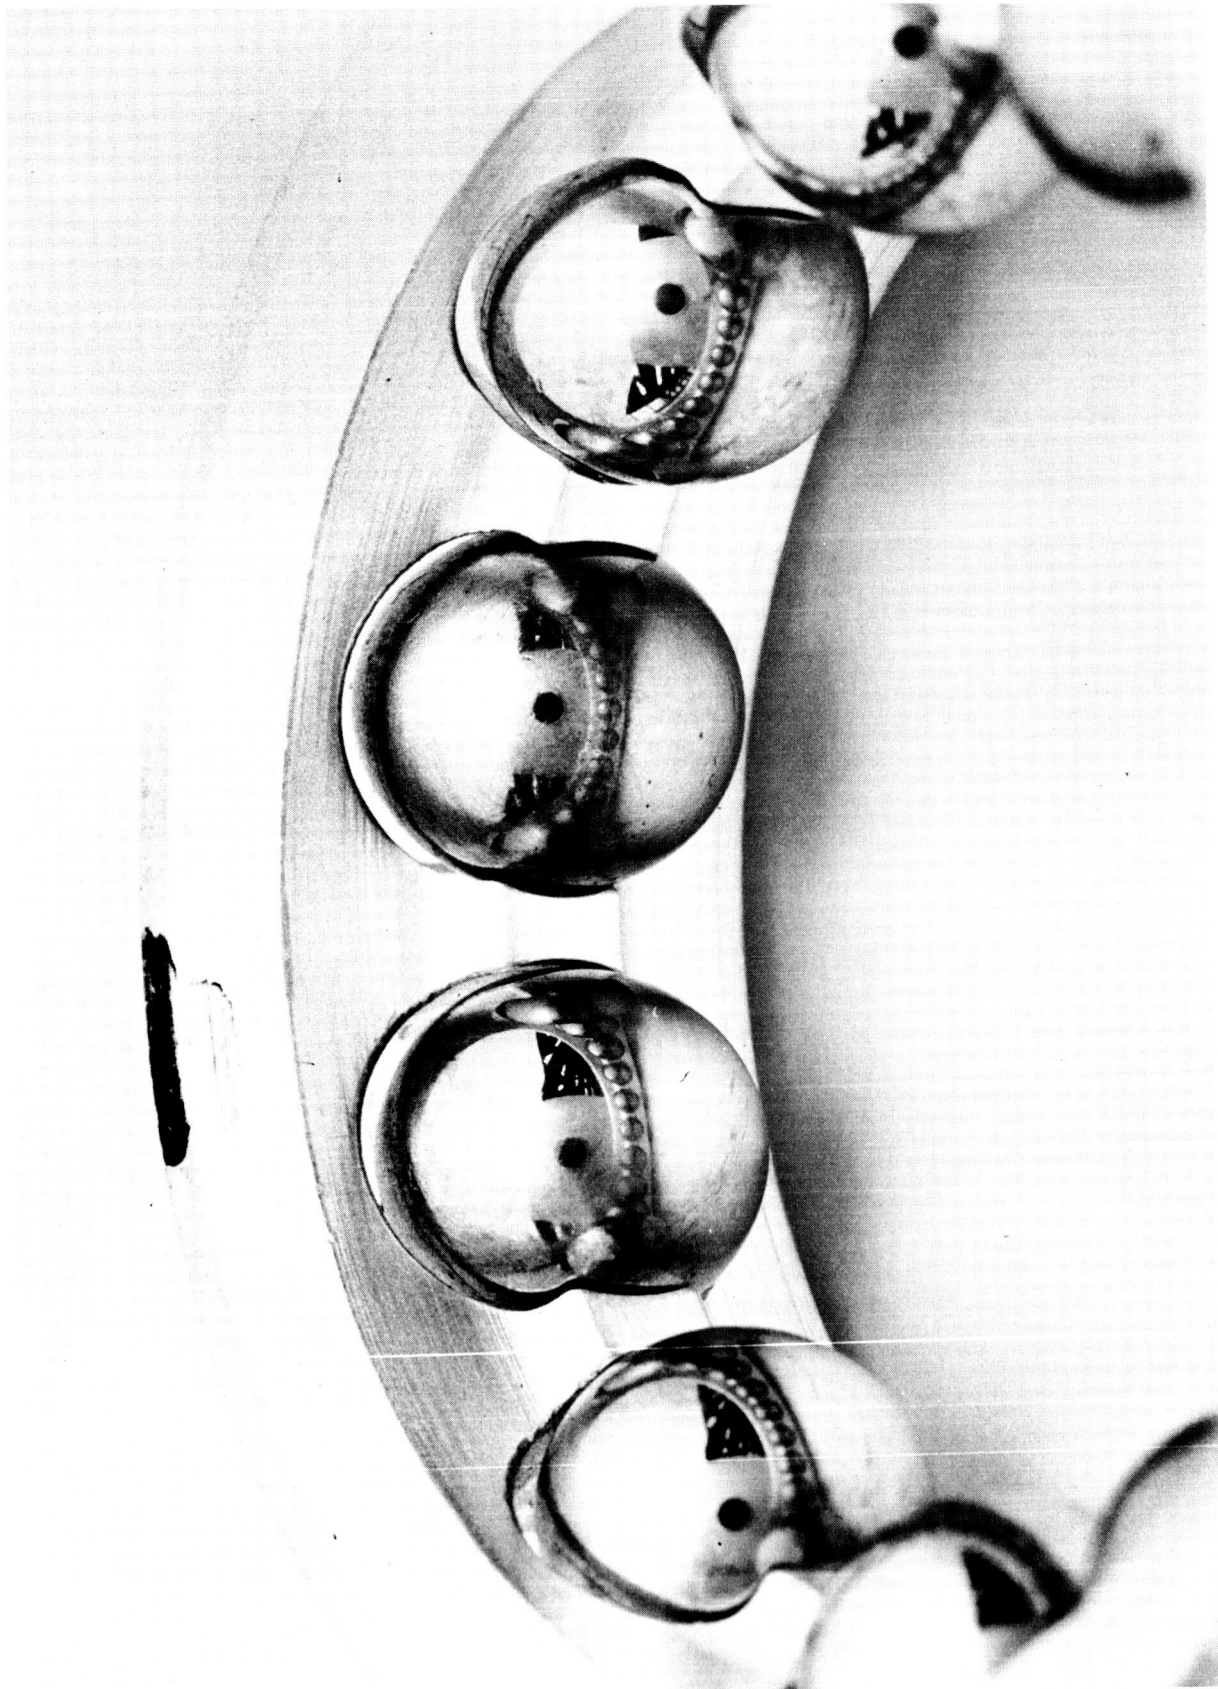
BALL BEARING RETAINER AND BALL COMPLEMENT
